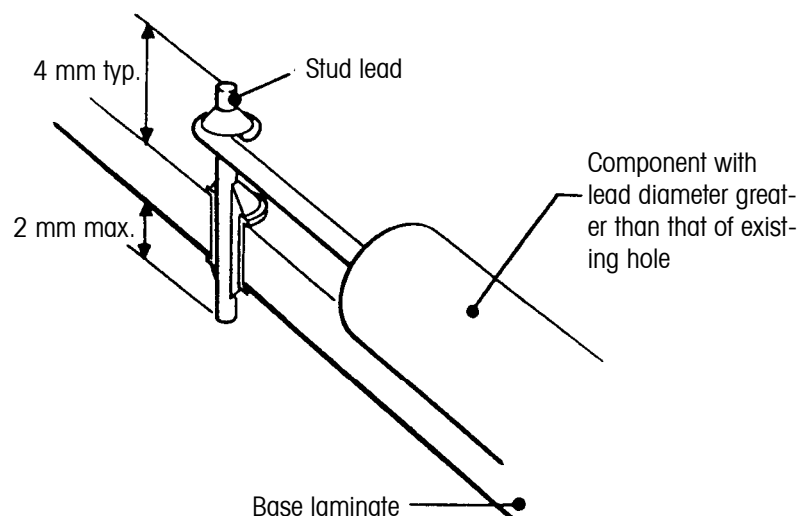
Soldering of component lead to a stud lead mounted into an existing hole
